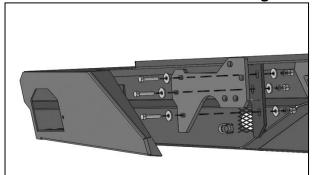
A) Attach Bumper Assembly to Mounting Brackets
